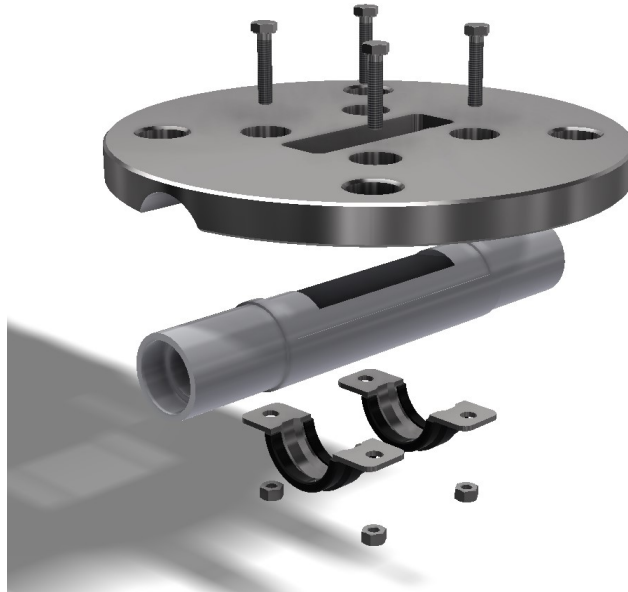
A rendering of the inlet manifold assembly. The assembly consists of a 3D printed inlet tube and a stainless steel flange fitted together using pipe clamps
